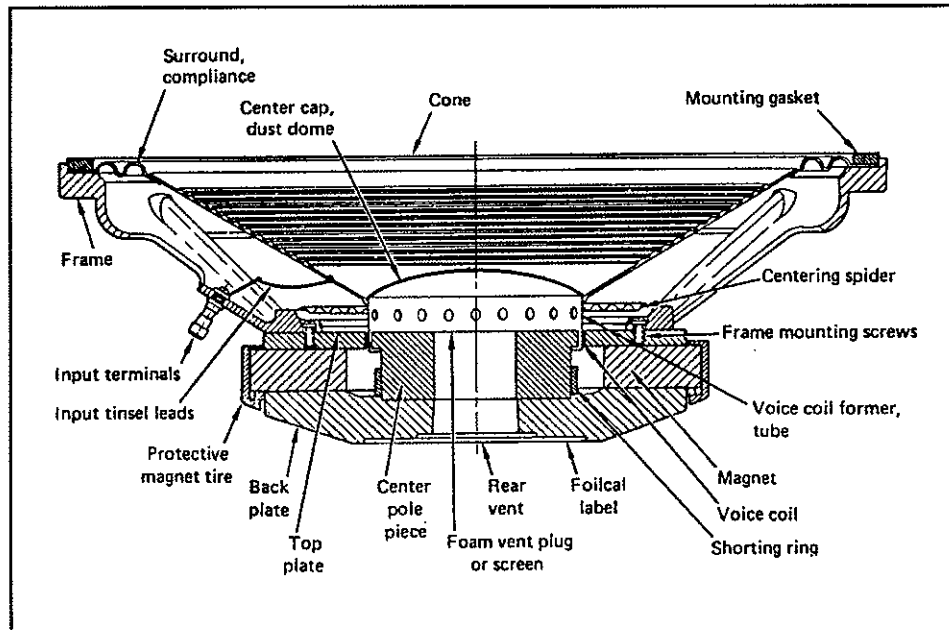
Sectional drawing of a typical dynamic cone driver showing details of the major component parts. Drawing courtesy of JBL, Inc.
